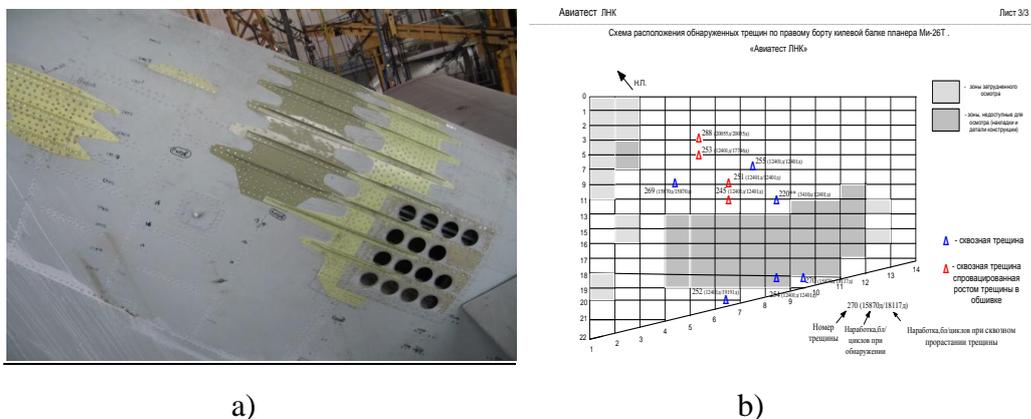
Fatigue cracks on keel beam, after several repairs a) - natural view, b) –scheme view
